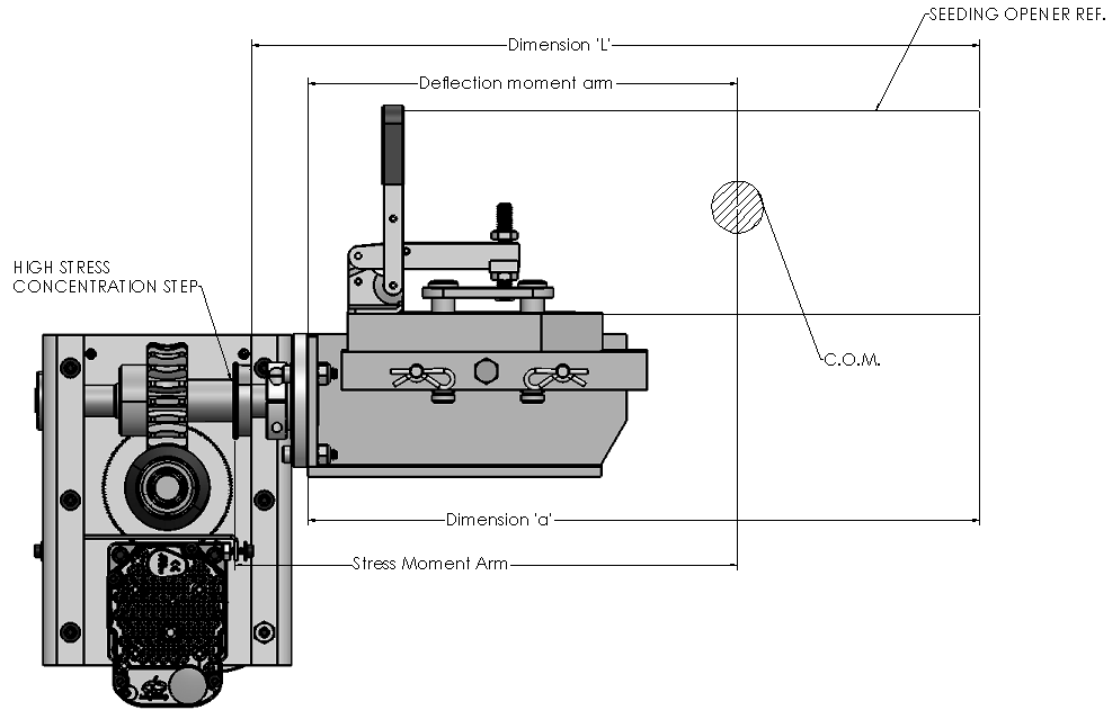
The dimensions concerning the moment, stress, and deflection calculations for the rotational gearbox.
